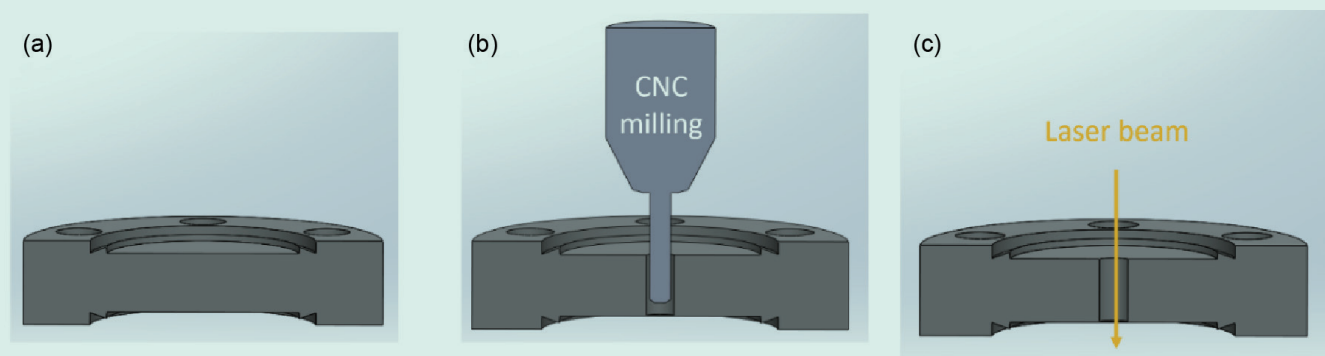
Manufacturing processes of a flange-type SLE: (a) preparation of a double-sided 16CF flange; (b) CNC (computer numerical control) milling to drill a blind hole on the flange, and (c) micro-hole drilling through the blind hole using femtosecond laser micromachining. [Reproduced from Ref. 2]
